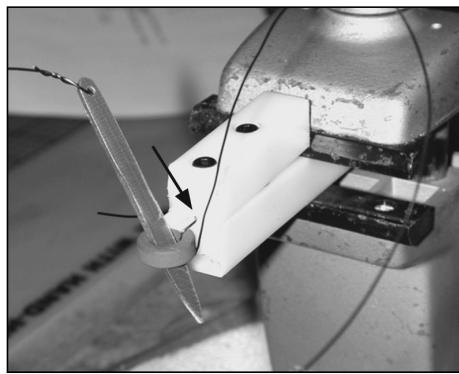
Holder clamped in a vise. Arrow (added by WA8MCQ) shows wire coming out of hole in clamp, mentioned in text.
